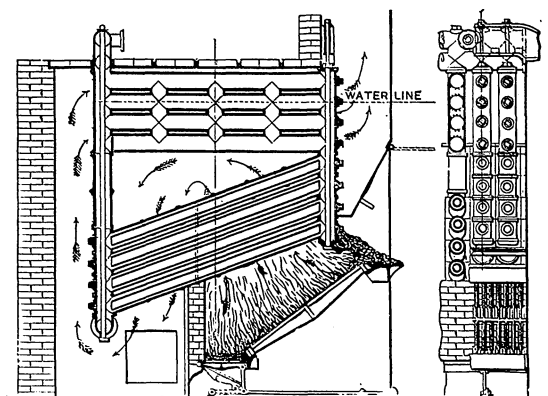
Early Type of Babcock & Wilcox Boiler, with Cast Iron Heating Surfaces.
